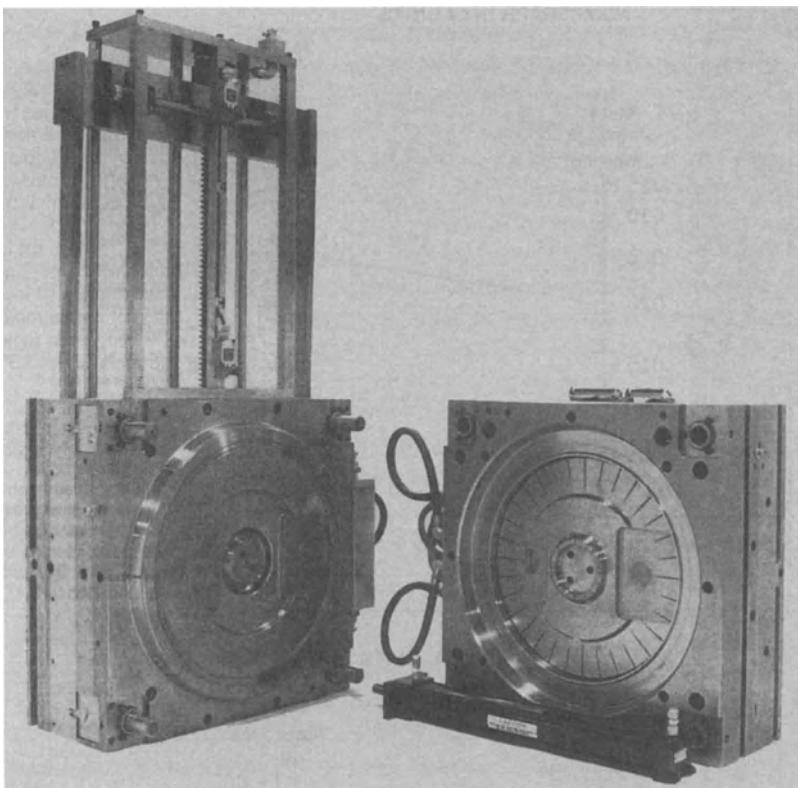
Industrial container lid mold. Rack-and-pinion mechanism rotates a core section for the threaded inspection hole in the lid.
